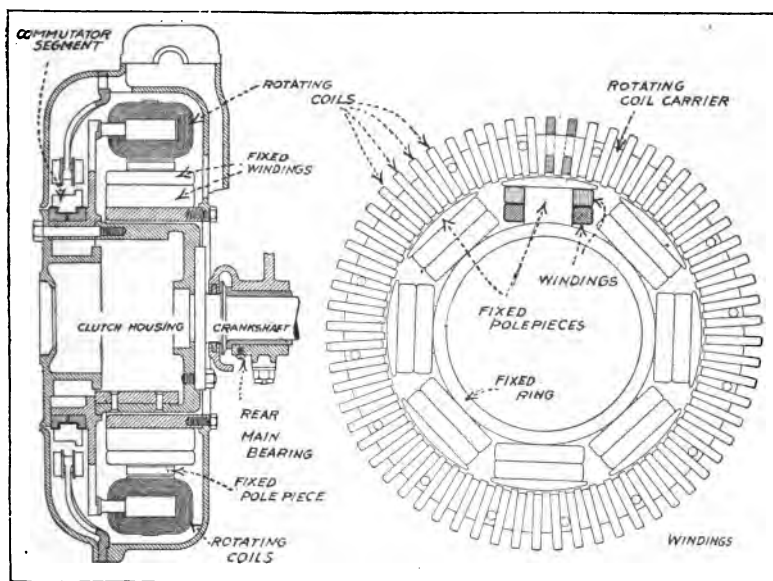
Diagram Showing Construction of U. S. L. Flywheel Type Dynamo Motor.
